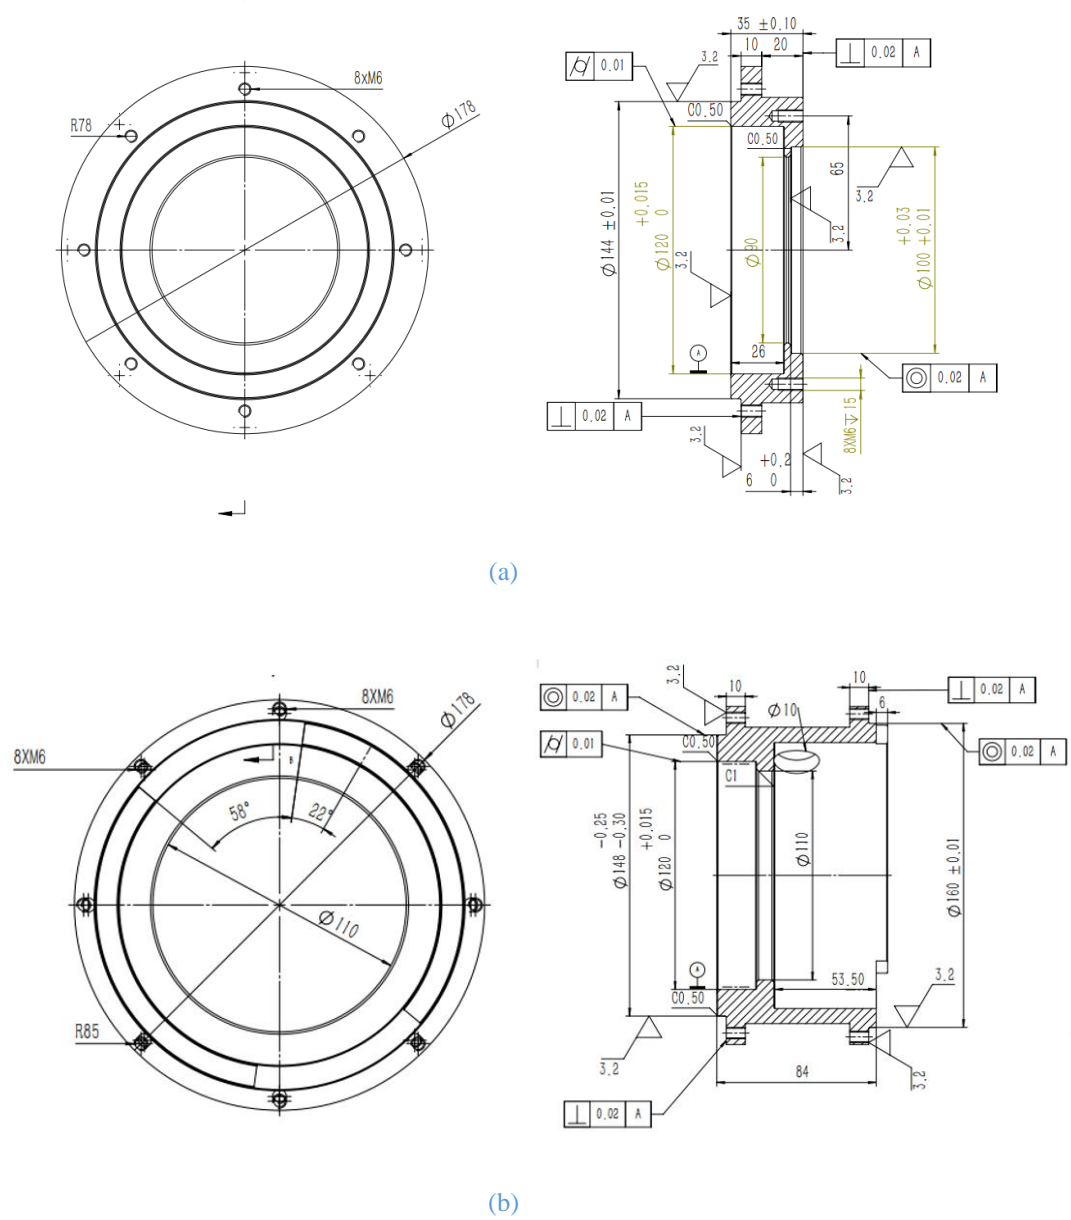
Drawing of end cap (a) left part (b) right part
